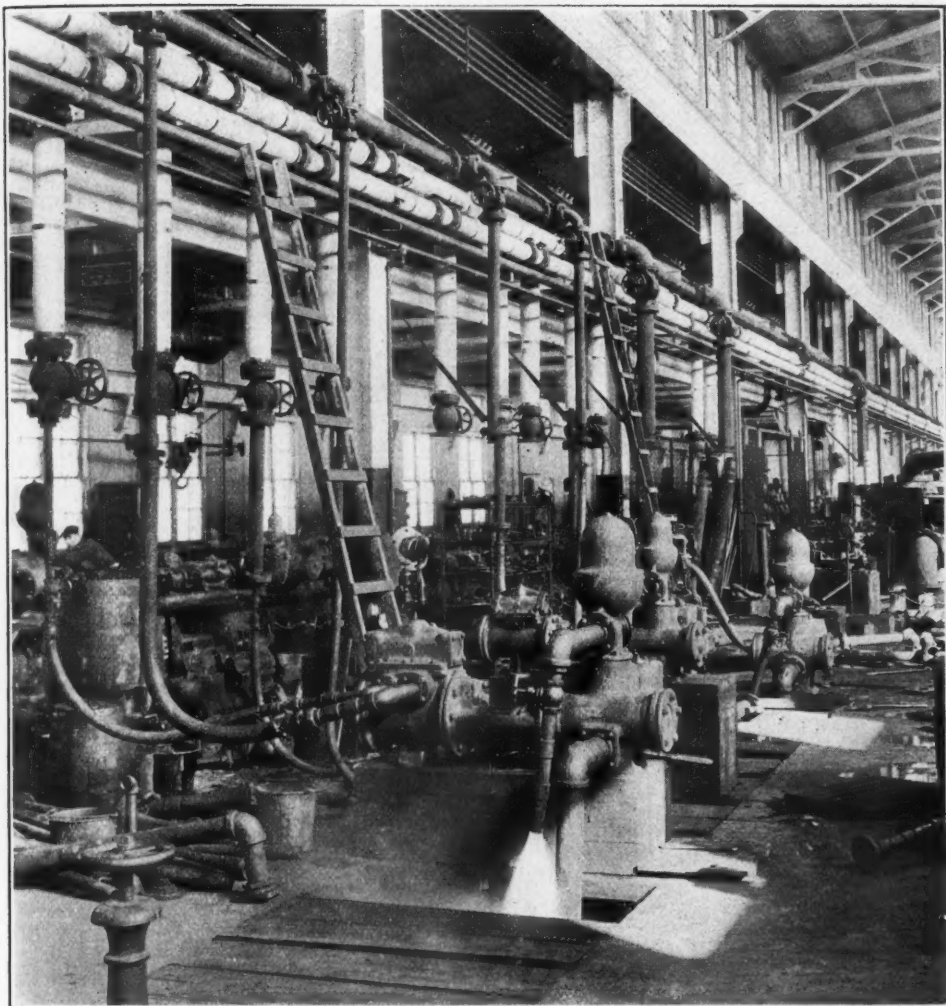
FIG. II. STEAM PUMP TESTING DEPARTMENT.
